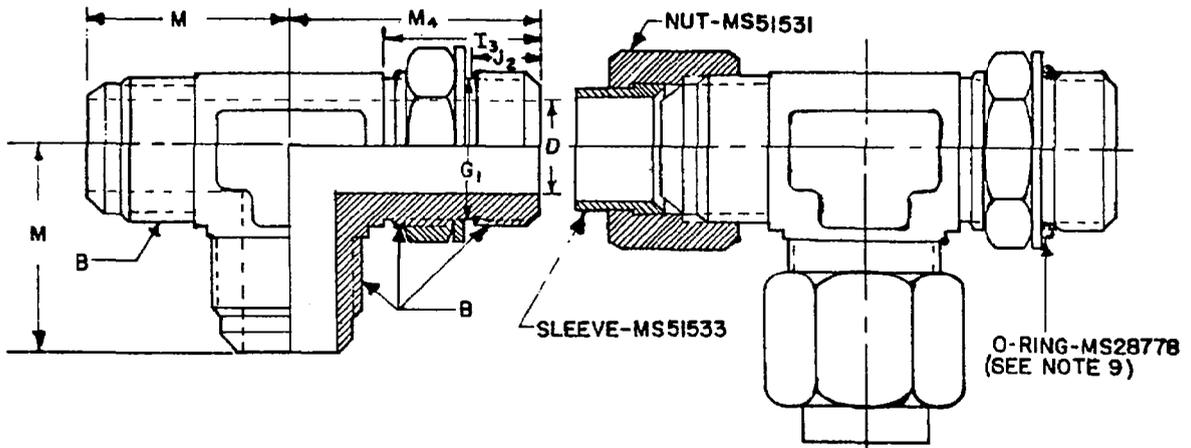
Elbow, Tube to Boss, Boss on Run, O-Ring, Flared.
